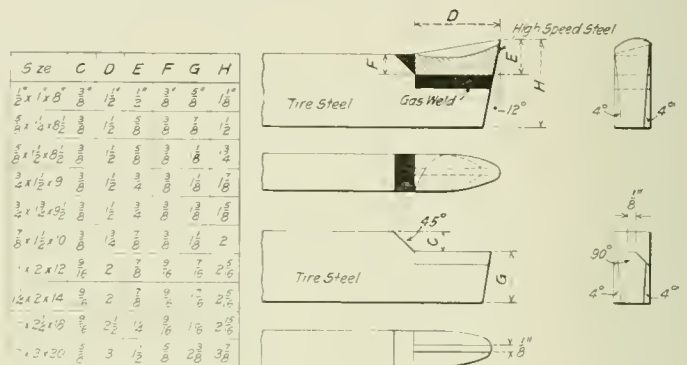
Method of Welding High Speed Steel Tips to Carbon Steel Tool Shanks
